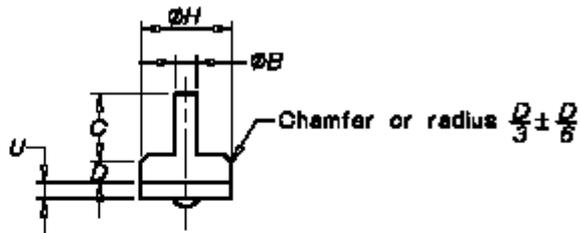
SPINDLES FOR TAPS WITH O-RINGS
